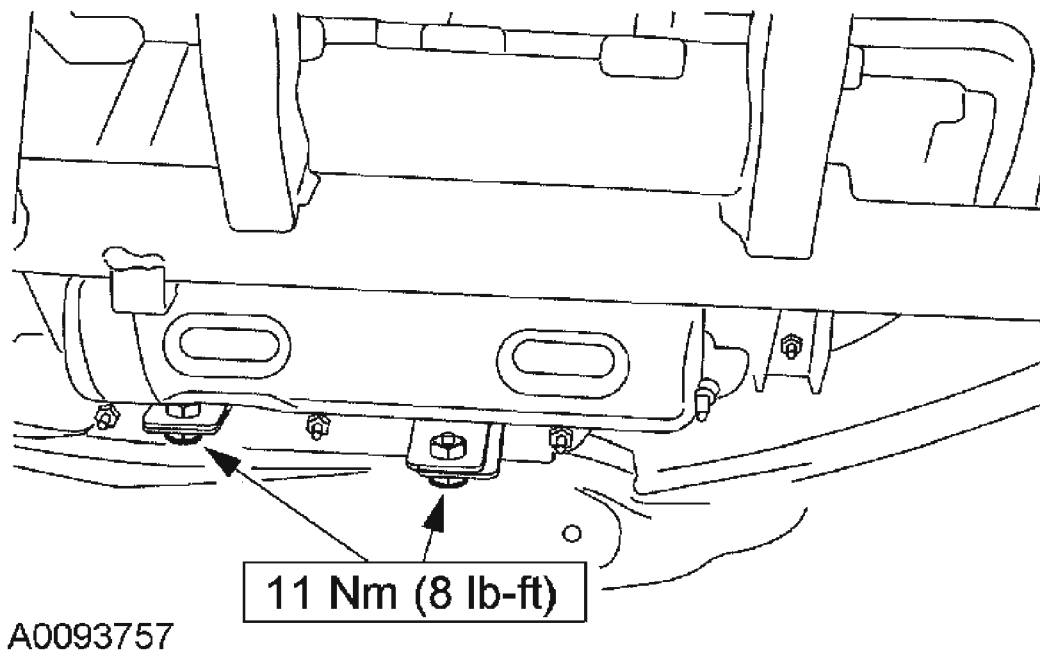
Tightening Passenger Air Bag Module Trim Cover Retaining Bolts
